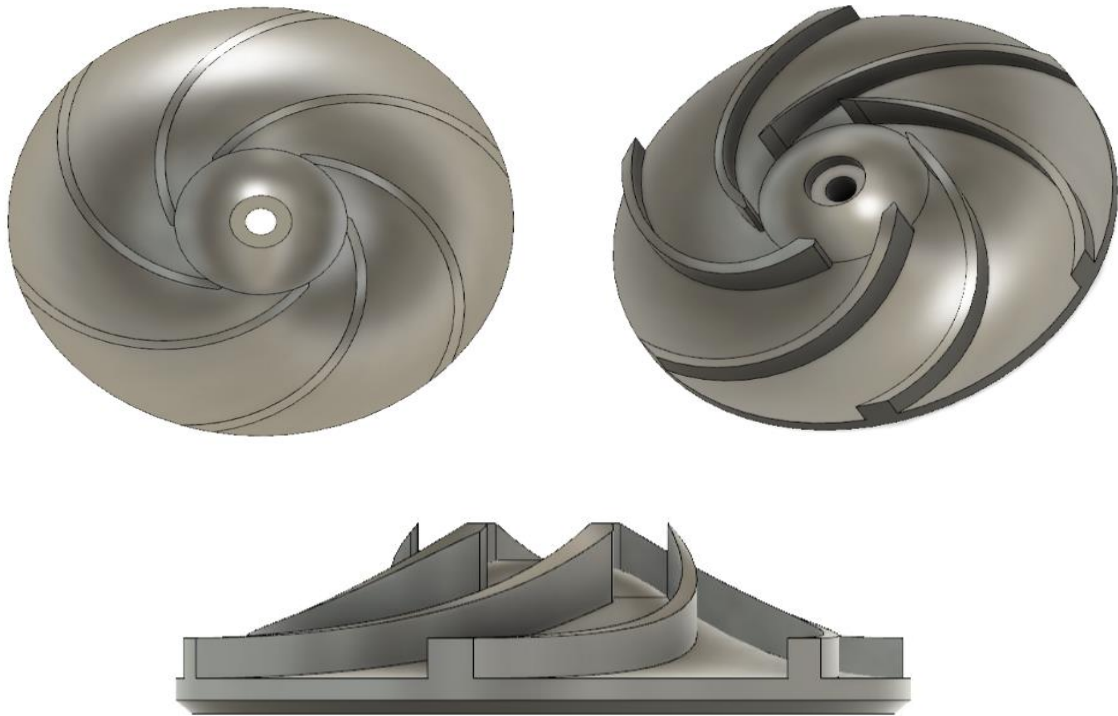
, 2.13, 2.14: Top, front and cornered view of the impeller.
